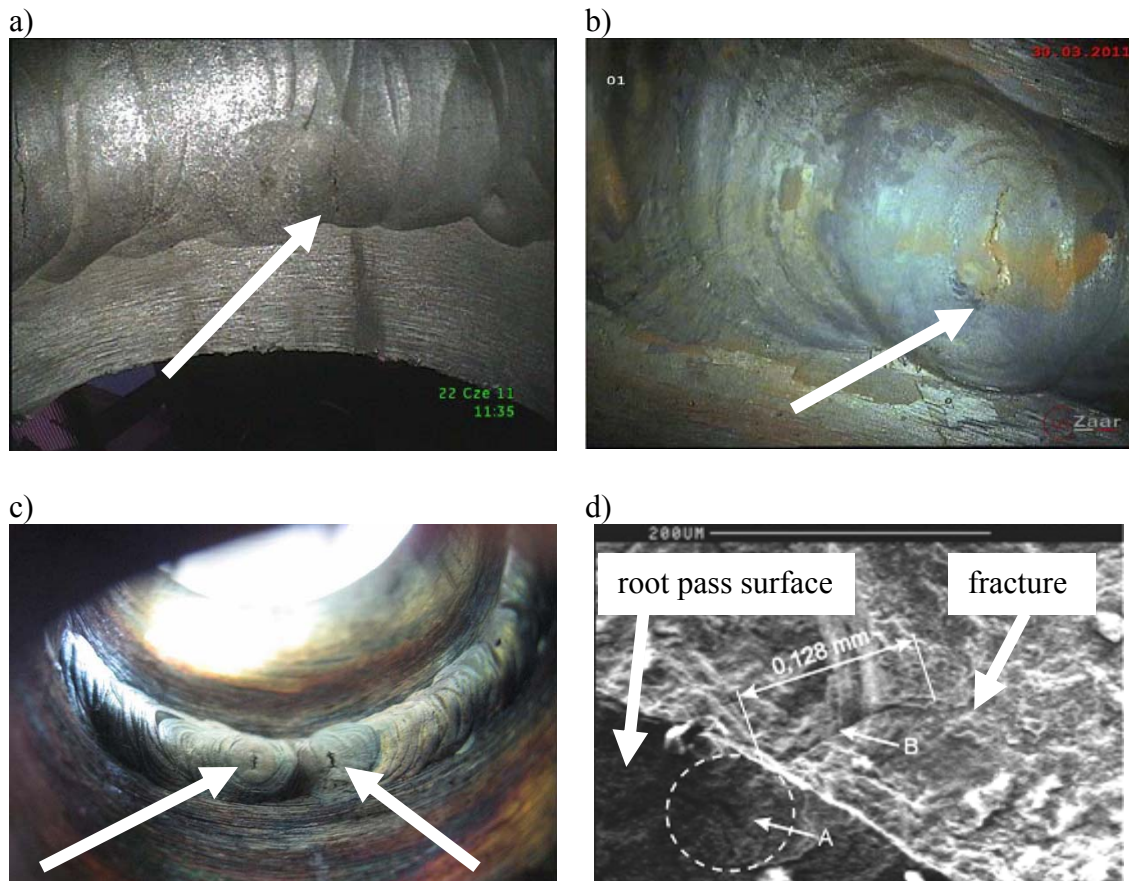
End crater crack at the root pass in butt weld joint of T24 steel:
